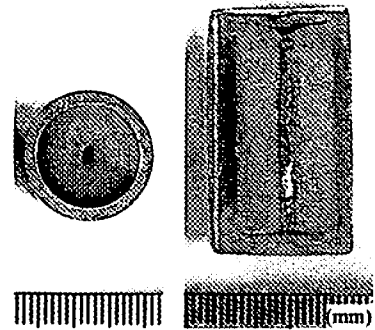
The maraging steel rod which is recovered (Test No. 2) (Left: cross section, Right: longitudinal section)
